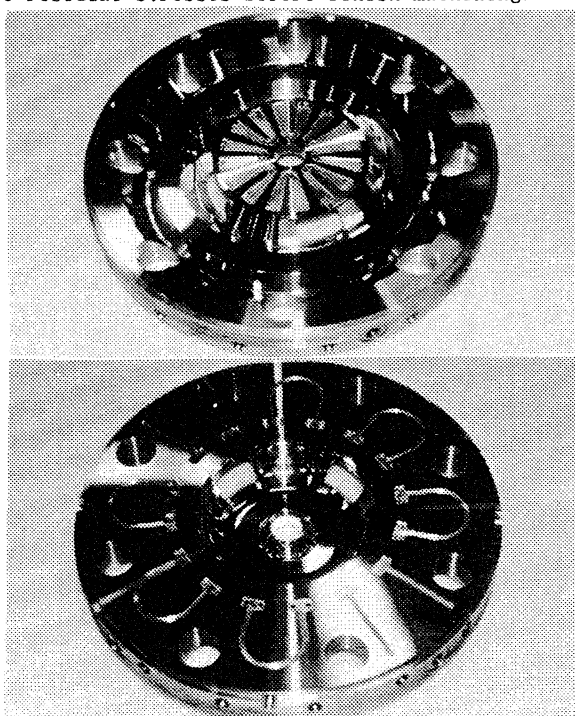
ACS half-cell showing both sides of the final machined cavity.
